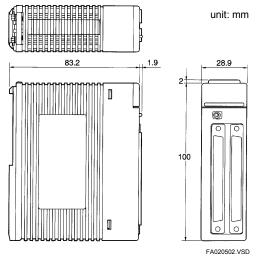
I/O Module External Dimensions (F3XD64-3N)
